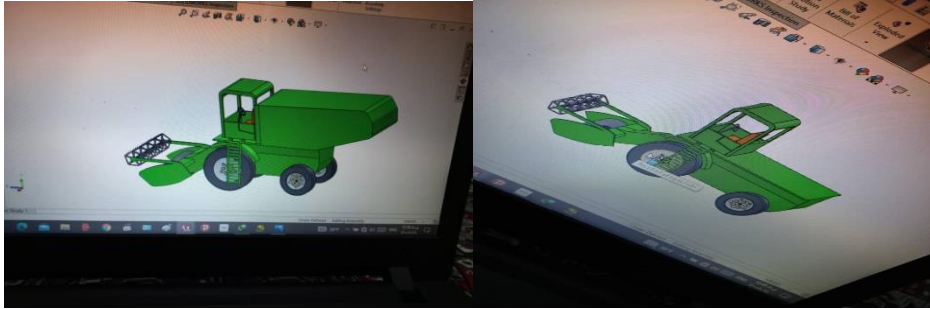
Modeling of the combine harvesting machine using Abaqus 2022 software
